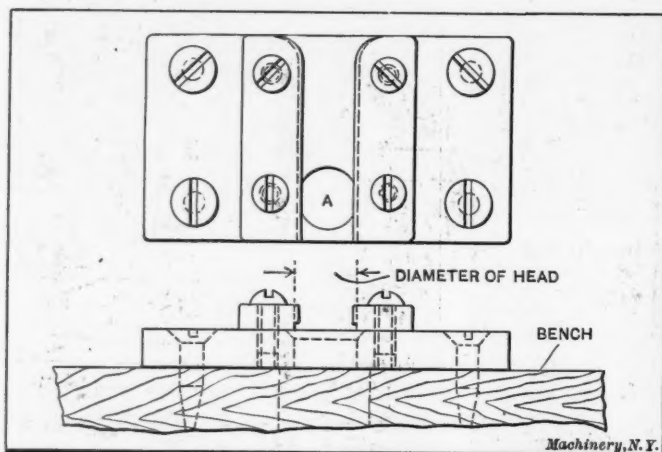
Snap-gage used on the Bench for Gaging the Head of the Shell
